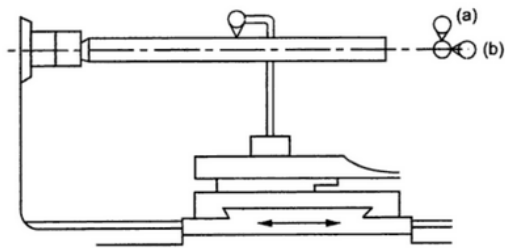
Test setup for true running of the spindle of a lathe
